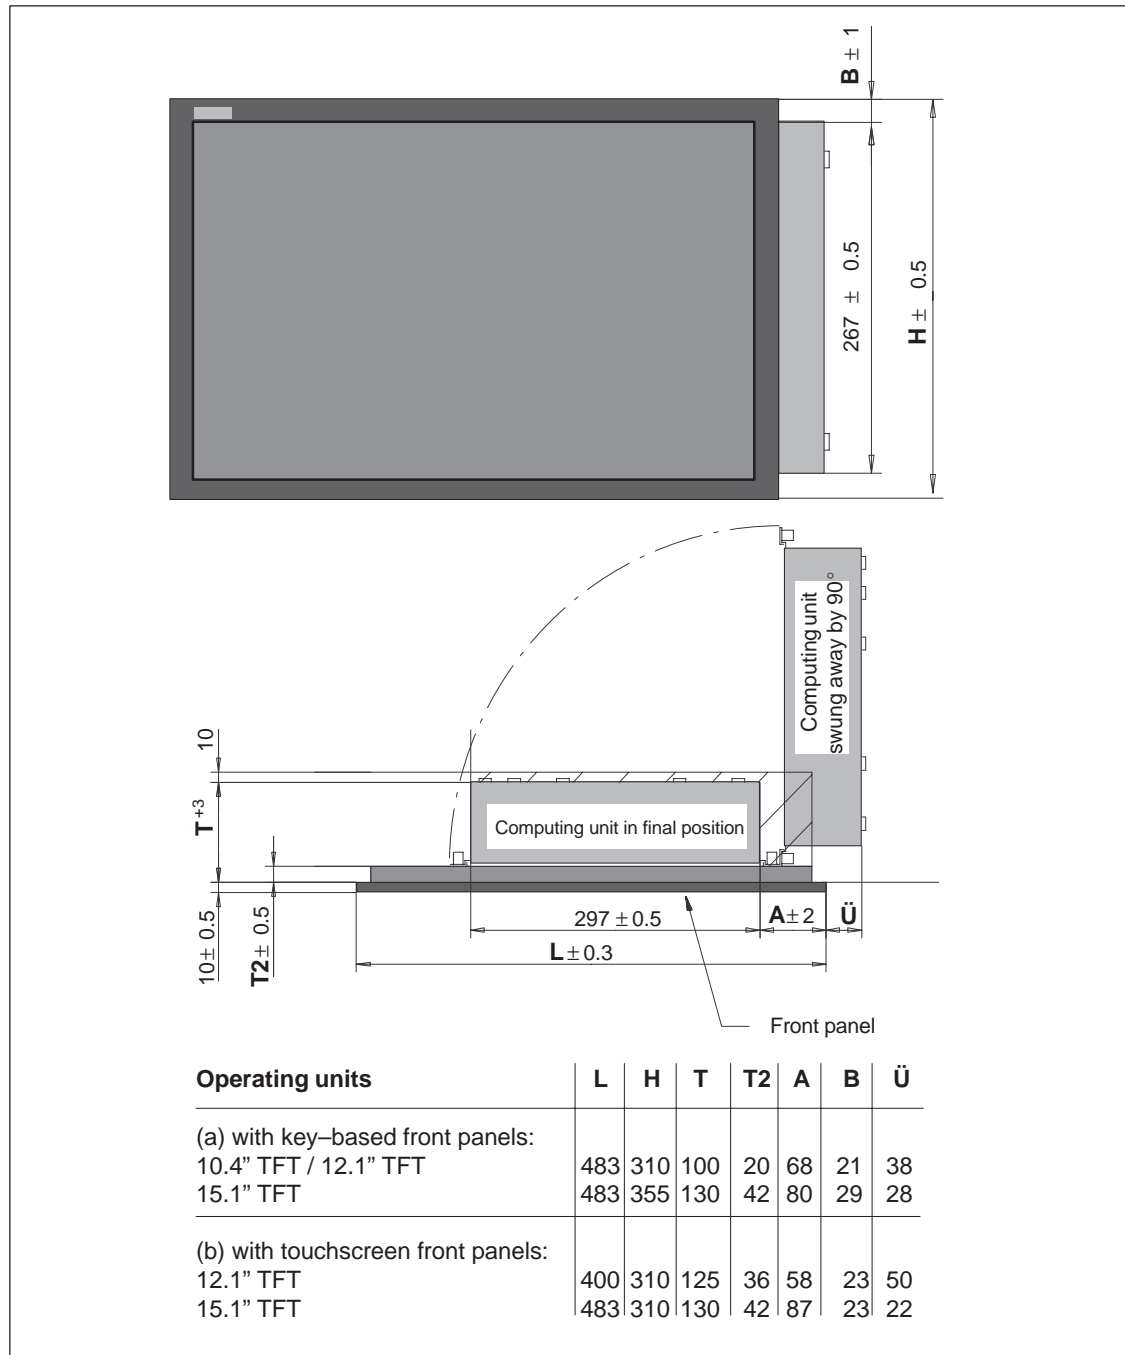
Device dimensions Panel PC 670 (in mm); all dimensions without screw protrusions
